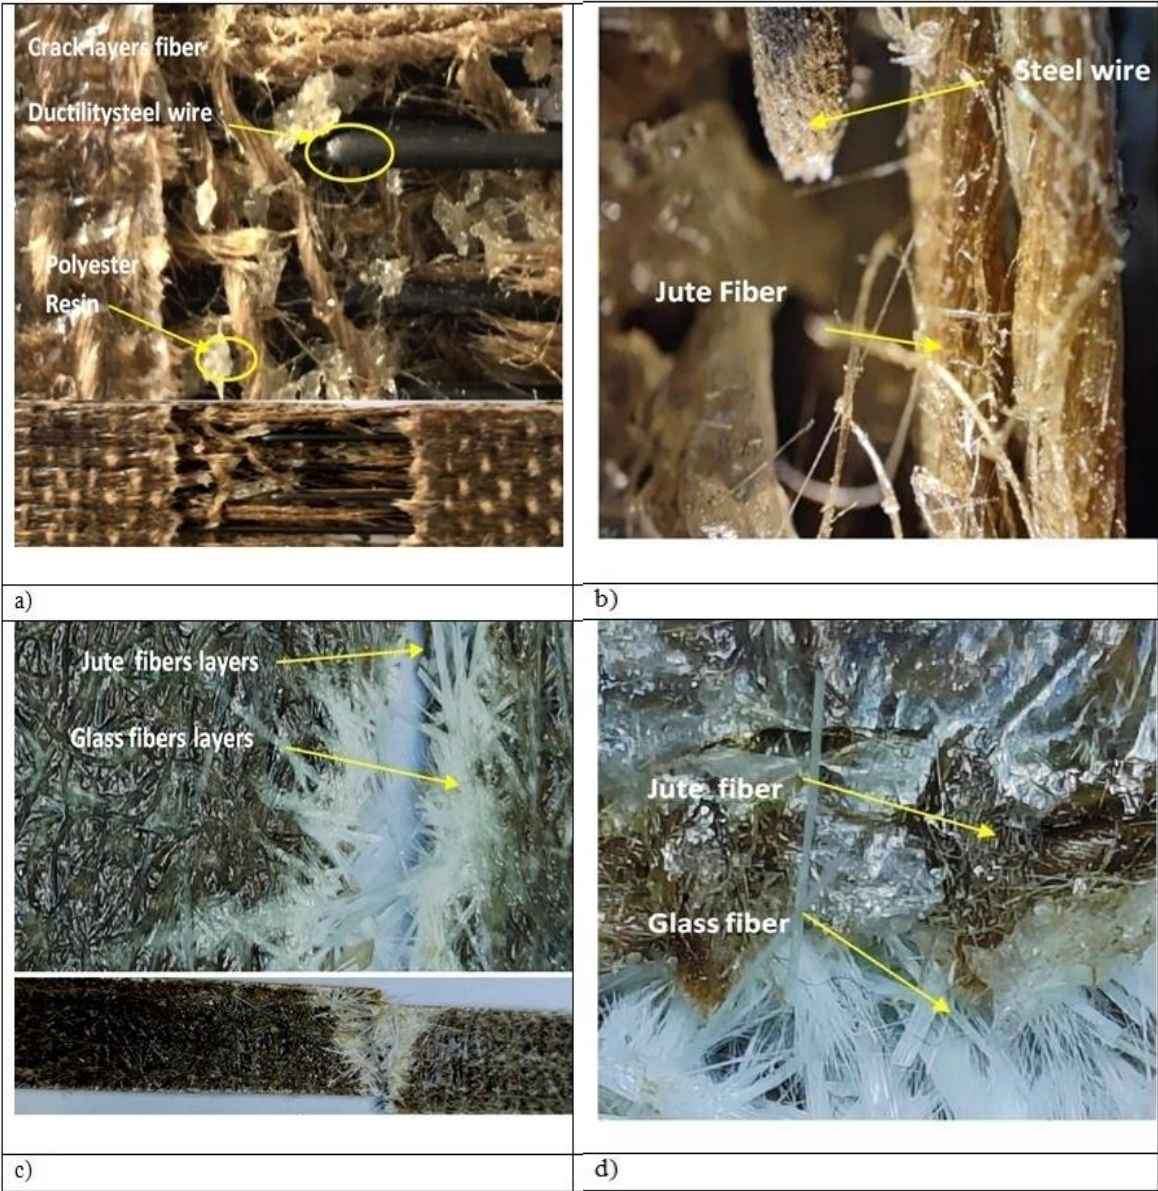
Failure analysis fractography, a) and b) Sample of natural fiber composite (S5),(c) and (d)Sample of hybrid composite (S2).
